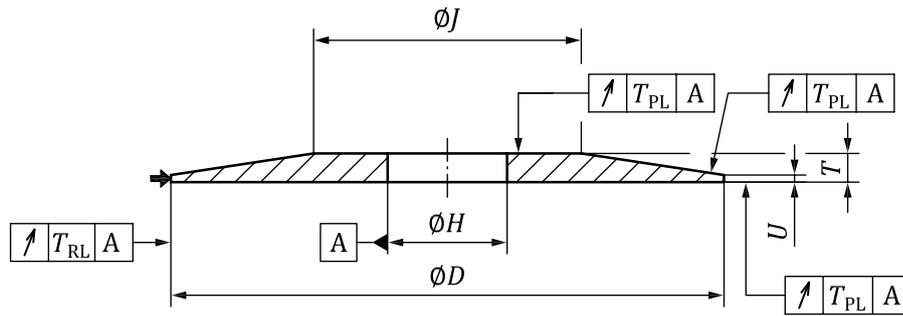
Grinding wheel, tapered on one side (Type 3)
